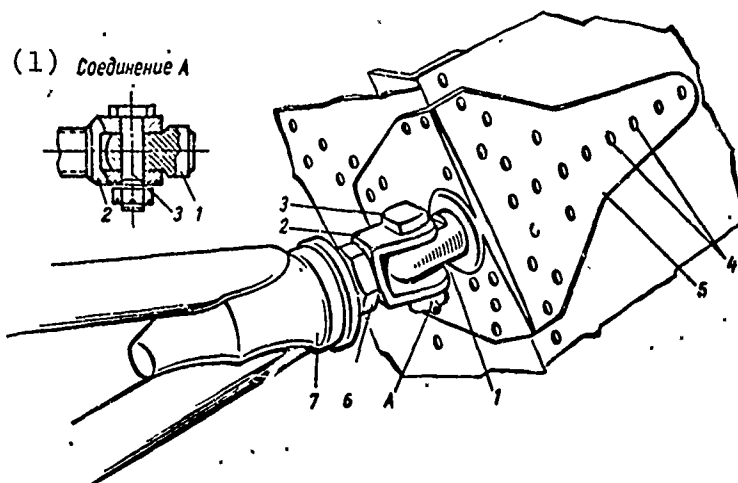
Engine mount attachment lug to the fuselage: 1 - attachment lug of the engine mount to the fuselage; 2 - forked bolt; 3 - clamp bolt; 4 - rivets; 5 - duralumin plate; 6 - lock nut; 7 - jacket of engine mount.
